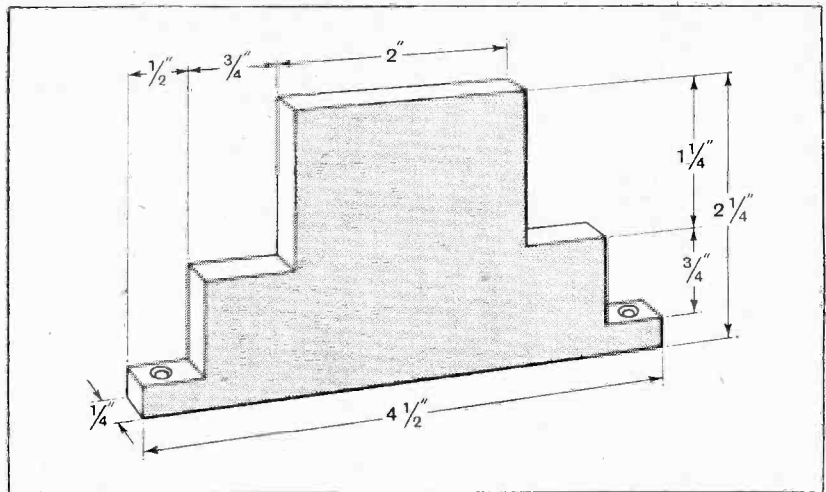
Dimensioned sketch of ebonite stand for the H.F. transformer.
